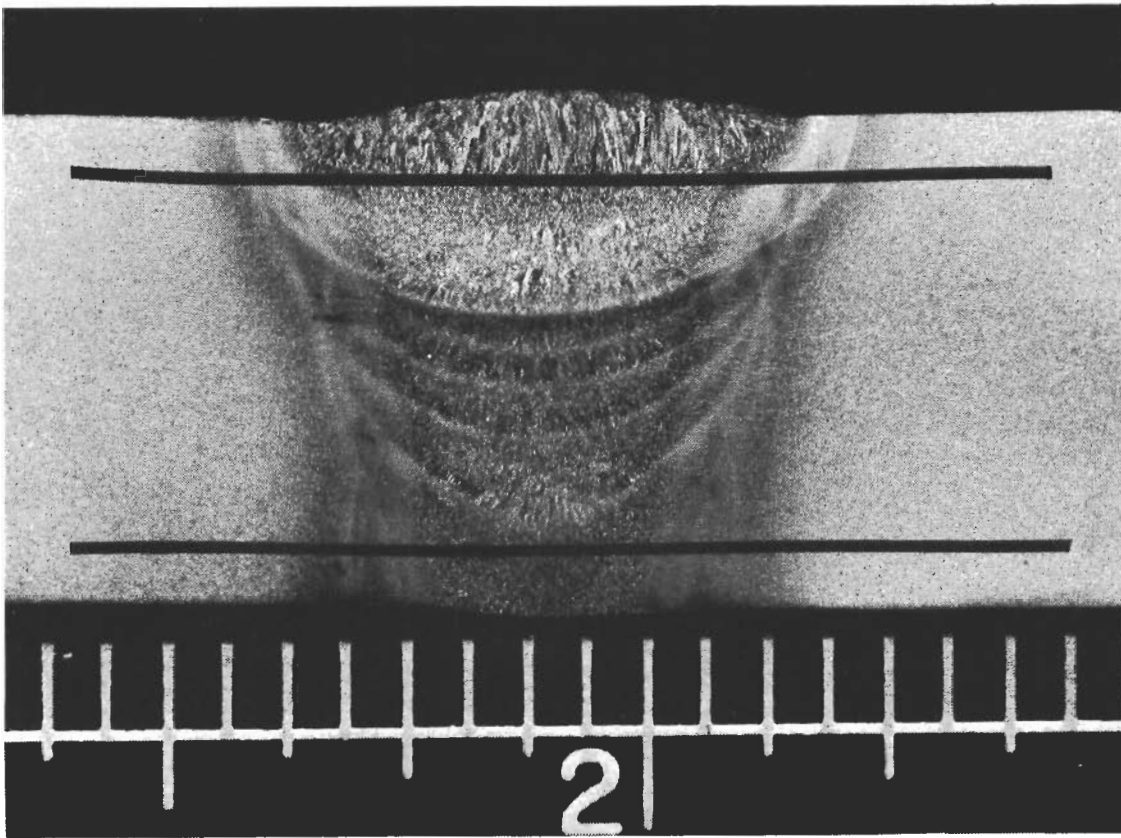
Typical Results of Microhardness Evaluations of Grade 250, 1/2-In.-Thick, 18% Maraging Steel Plate Weldments Using TIG Process, As Welded with Six Weld Passes Heat 120D163, Filler Wire 7C-093
